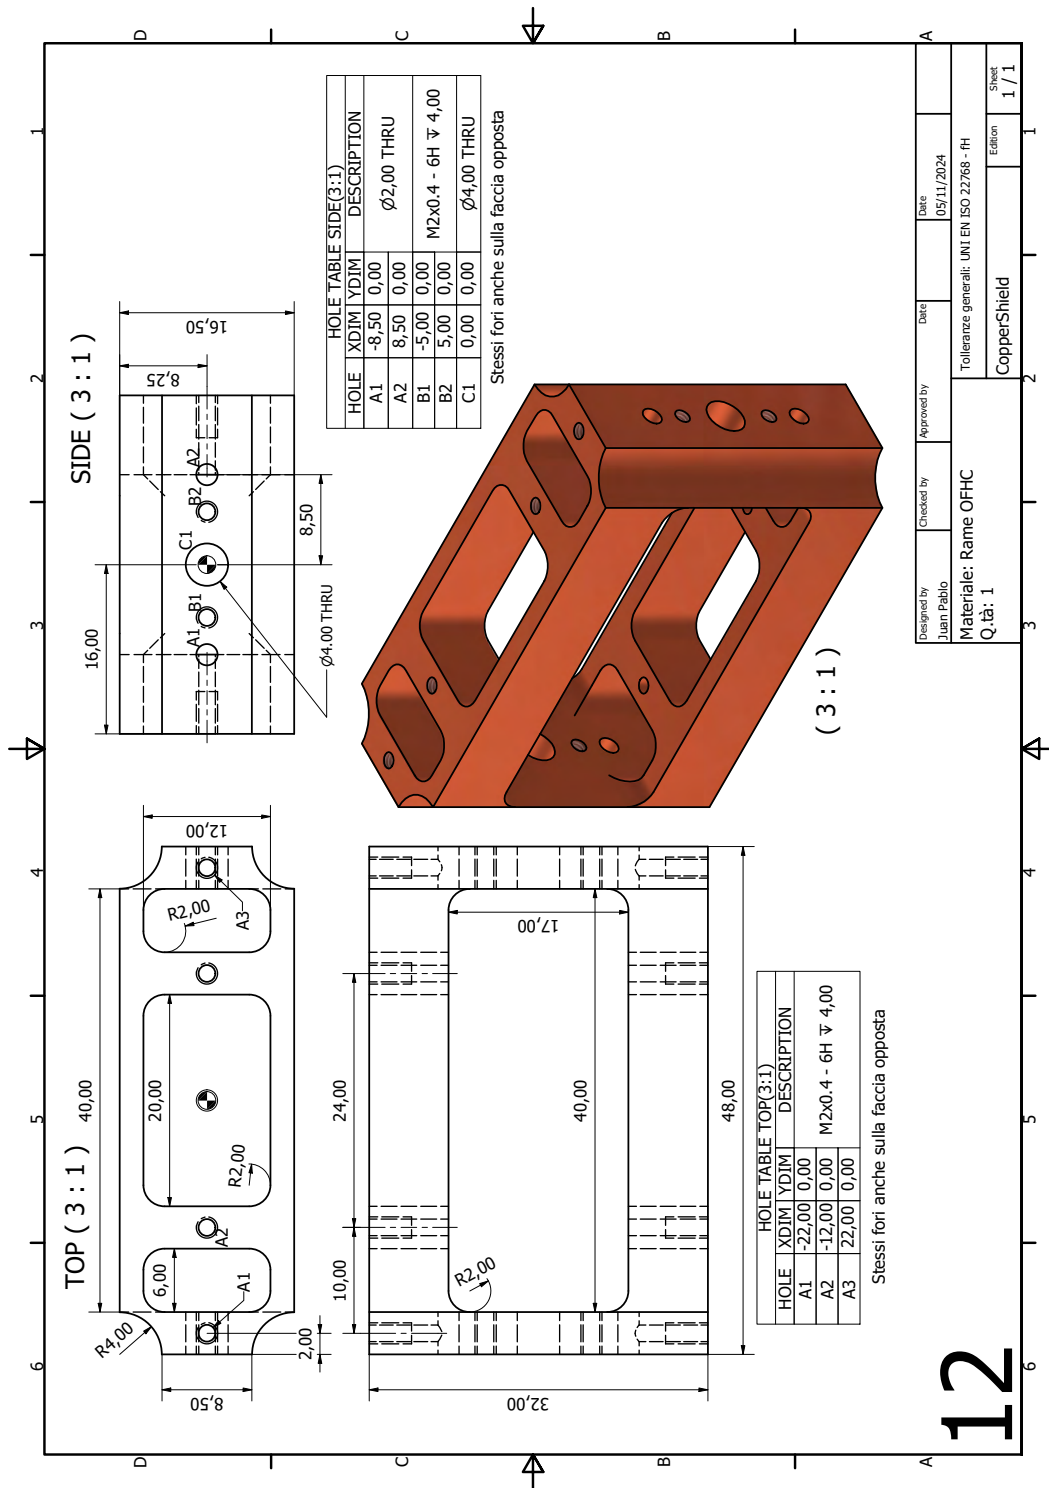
Technical drawing of the OFHC copper structure which will host electrodes and temperature sensors.
